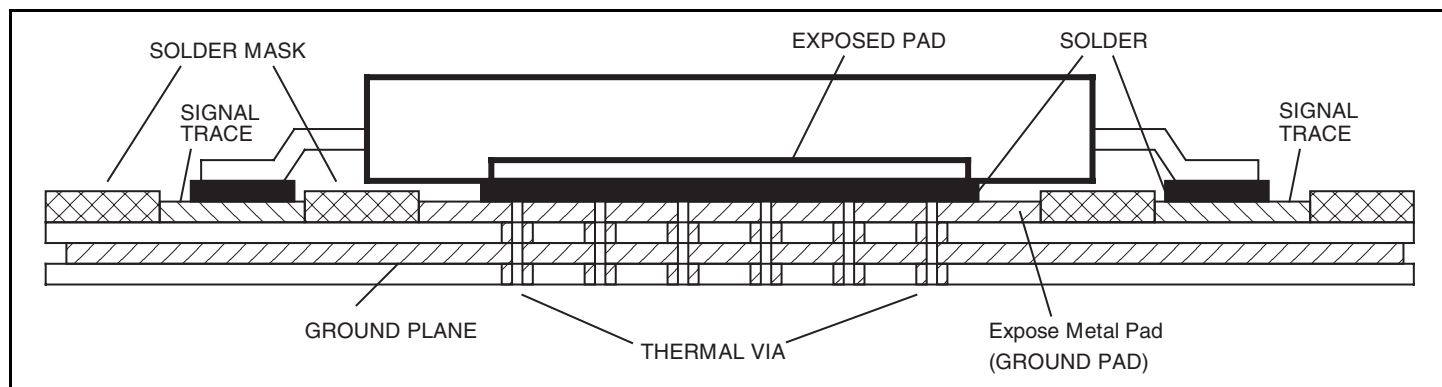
P.C. Board for Exposed Pad Thermal Release Path Example
